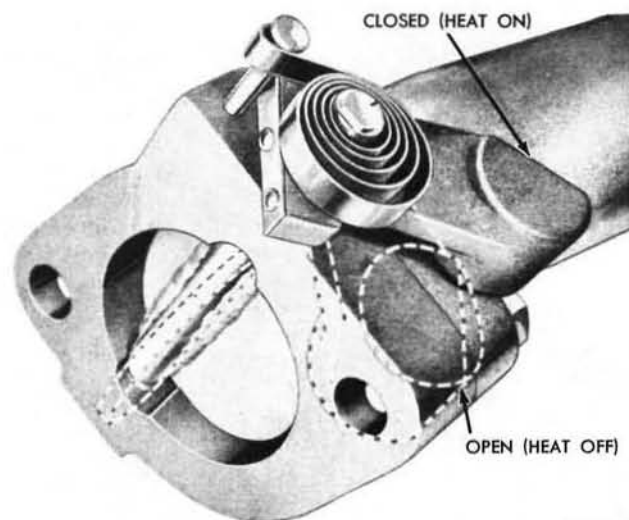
Exhaust Gas Control Valve—292 MD V-8
